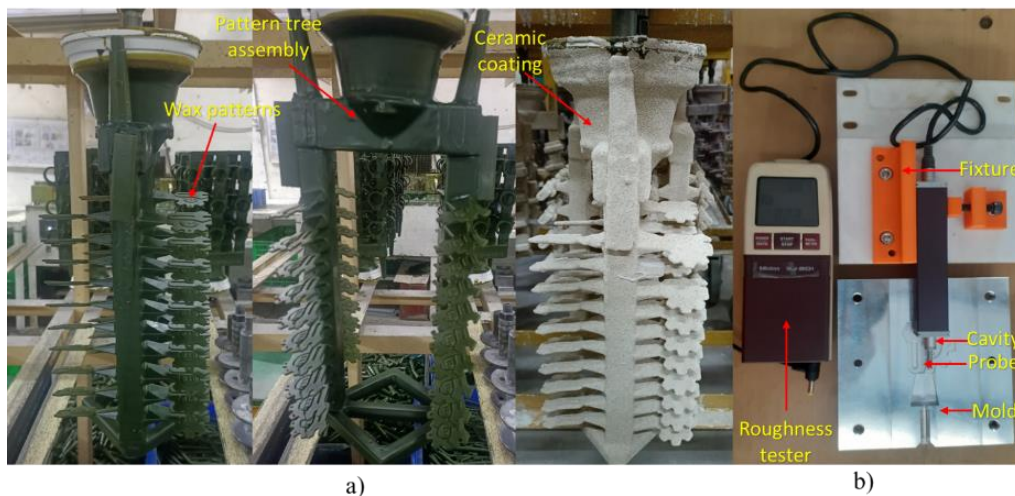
(a) Shell mold preparations. (b) The surface roughness tester and a fixture
